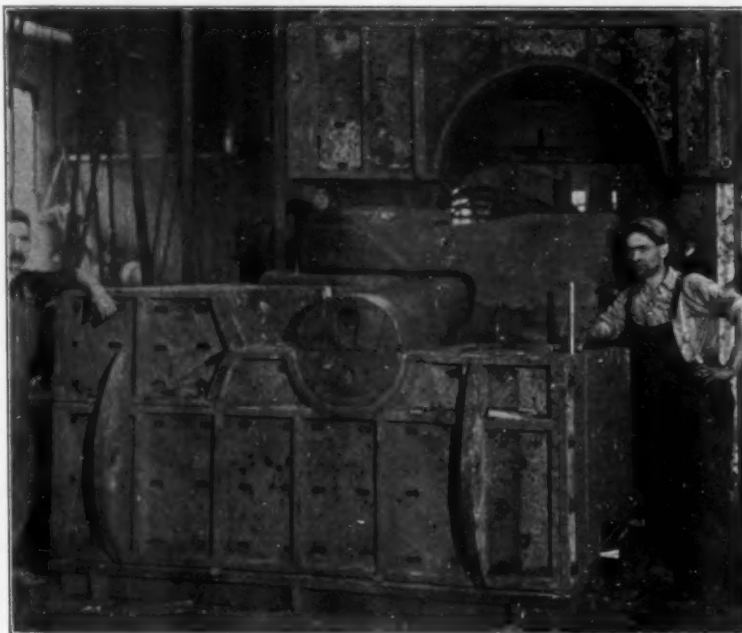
MOLD FOR THE LARGE PUMP CASTING. OPEN, SHOWING COPE RAISED IN THE AIR.
